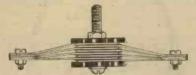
When assembling, the central screw must not touch the copper foil.
